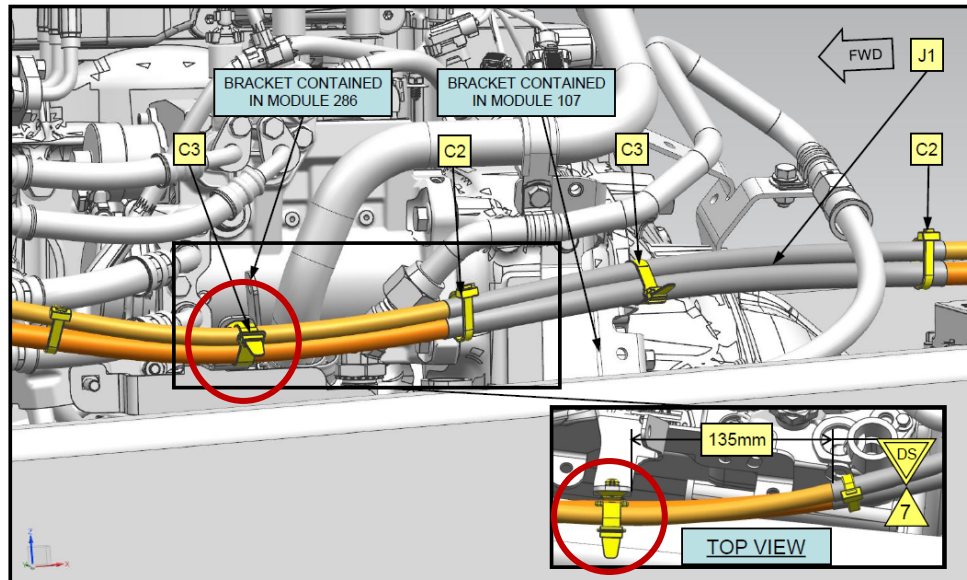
, Fuel Line and Harness Attached to Engine Harness Mounting Bracket
